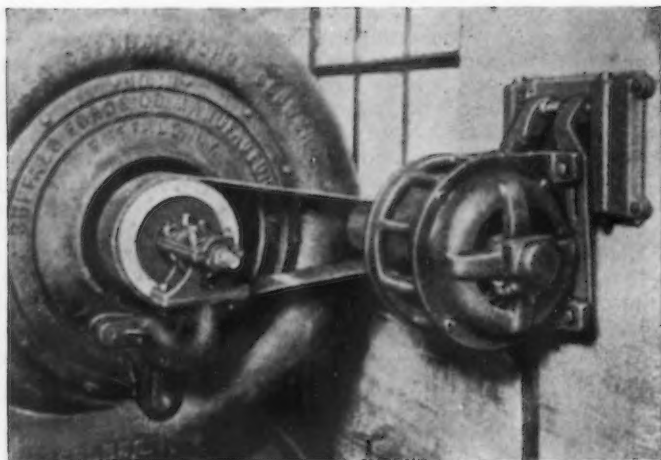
Short center, pivoted motor, flat belt drive from wall mounting to blower
